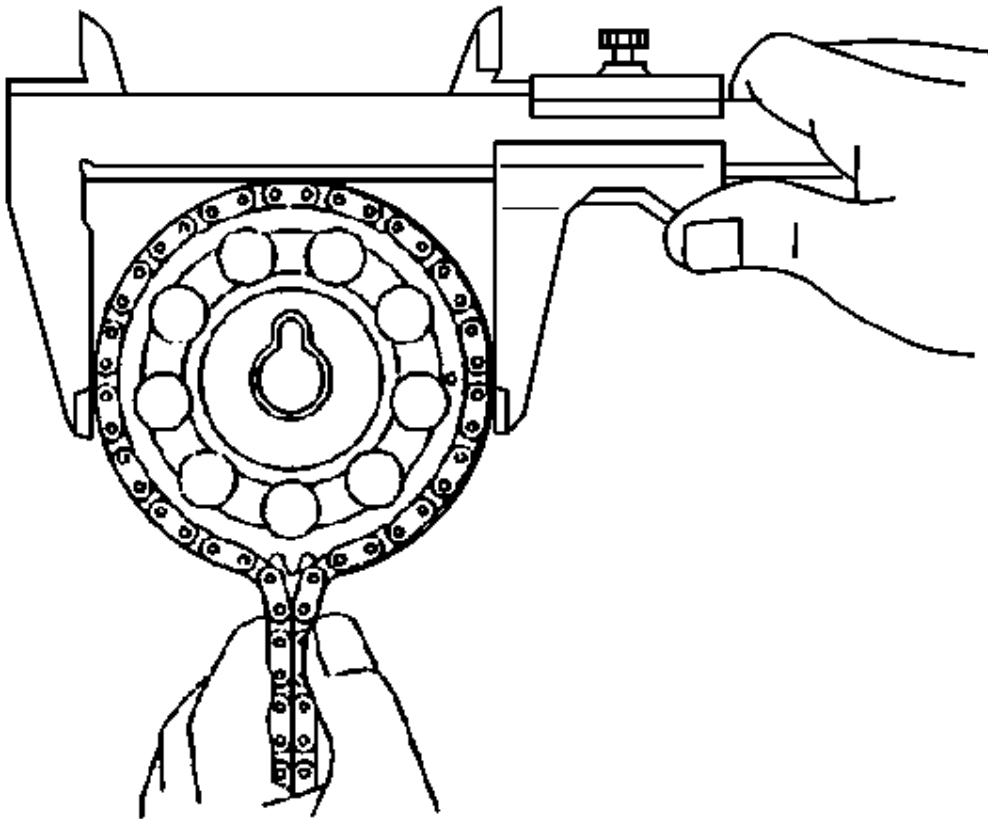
Inspecting Camshaft Timing Gear/Sprocket
